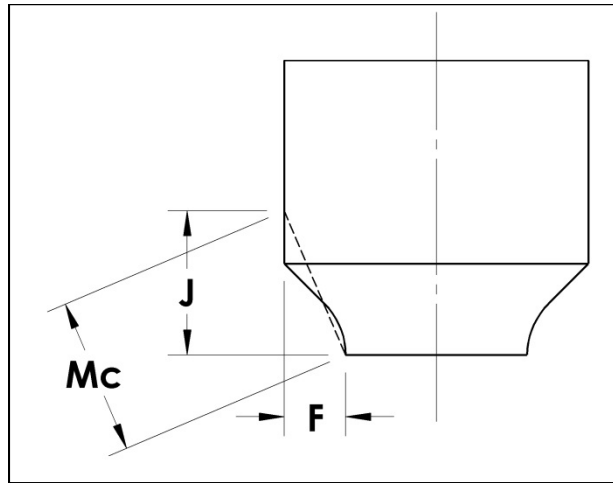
Length from Weld Root to Weld Toe on Coupler (When $C_w < J$)
